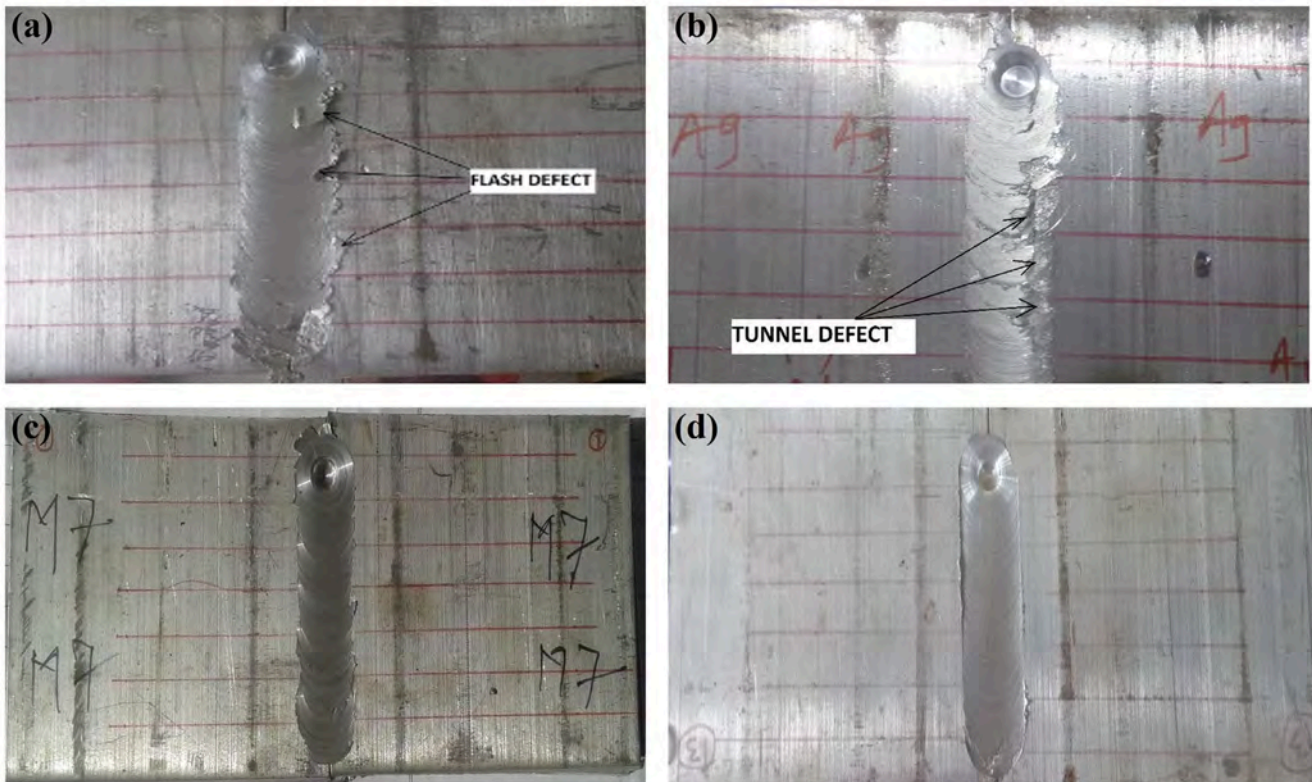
Weld appearance obtained under different backing conditions: (a,b) aluminium backing condition, (c) mild-steel backing condition, and (d) fly-ash-bed backing condition
